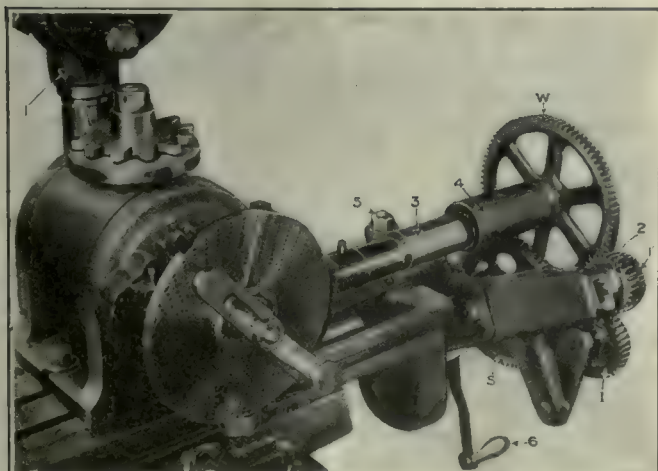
MILLING MACHINE ADAPTED TO CUTTING AN INVOLUTE CURVE ON GEAR TEETH
